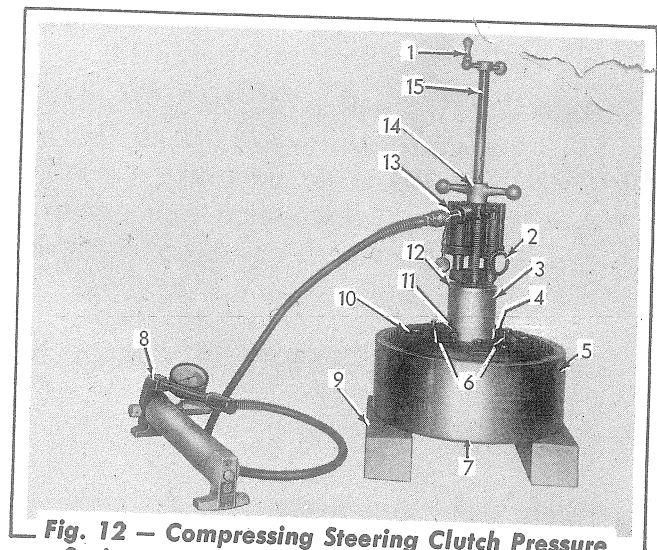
Compressing Steering Clutch Pressure Springs to Install Throwout Plate Capscrews
